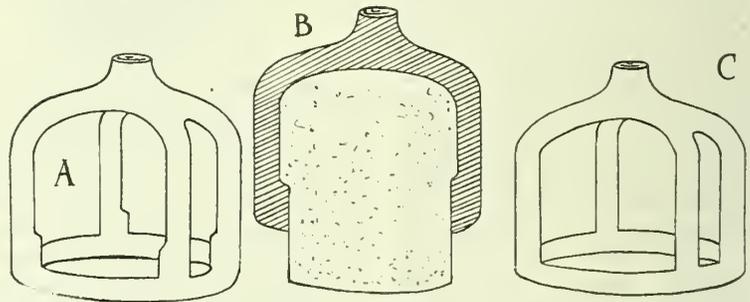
A shows casting with clearance for tap. B shows how the core was used to advantage. C shows casting made without core and without clearance for tap.
